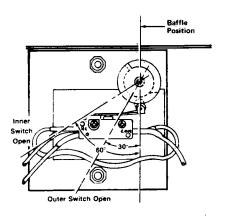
ICE FLAKER BAFFLE ASSEMBLY.
